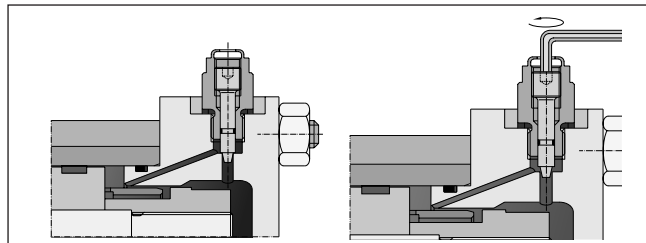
Adjustable end position cushioning with locked throttle bolt
